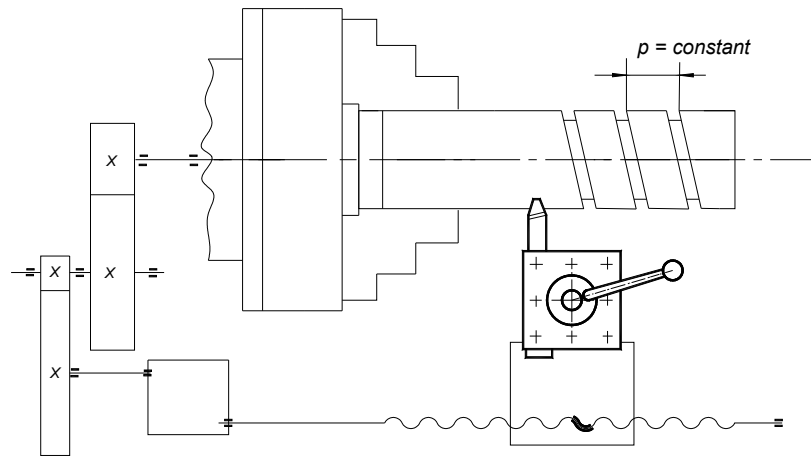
Kinematic chain corresponding to cutting threaded surface with constant pitch on a lathe.
